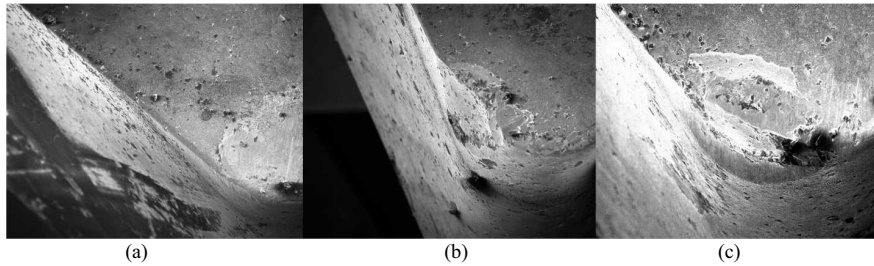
a) Tool wear at  $V=50\text{ m/min}$ : wear on rake and flank face
